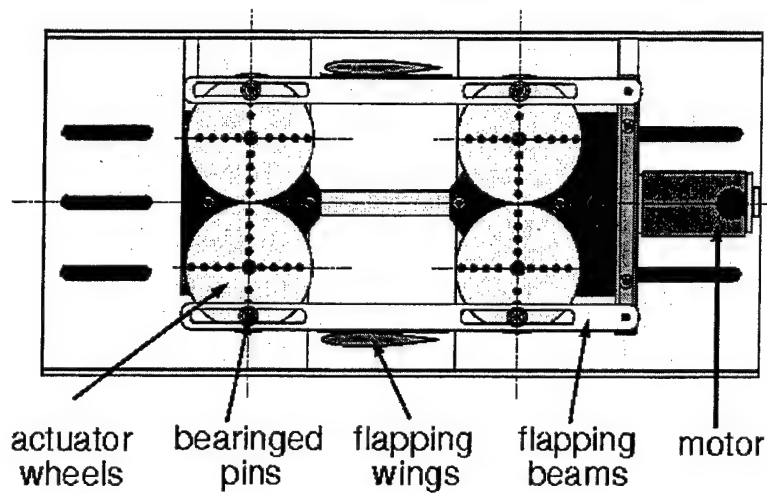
Profile View of Flapping Mechanism. From Ref. 5.
